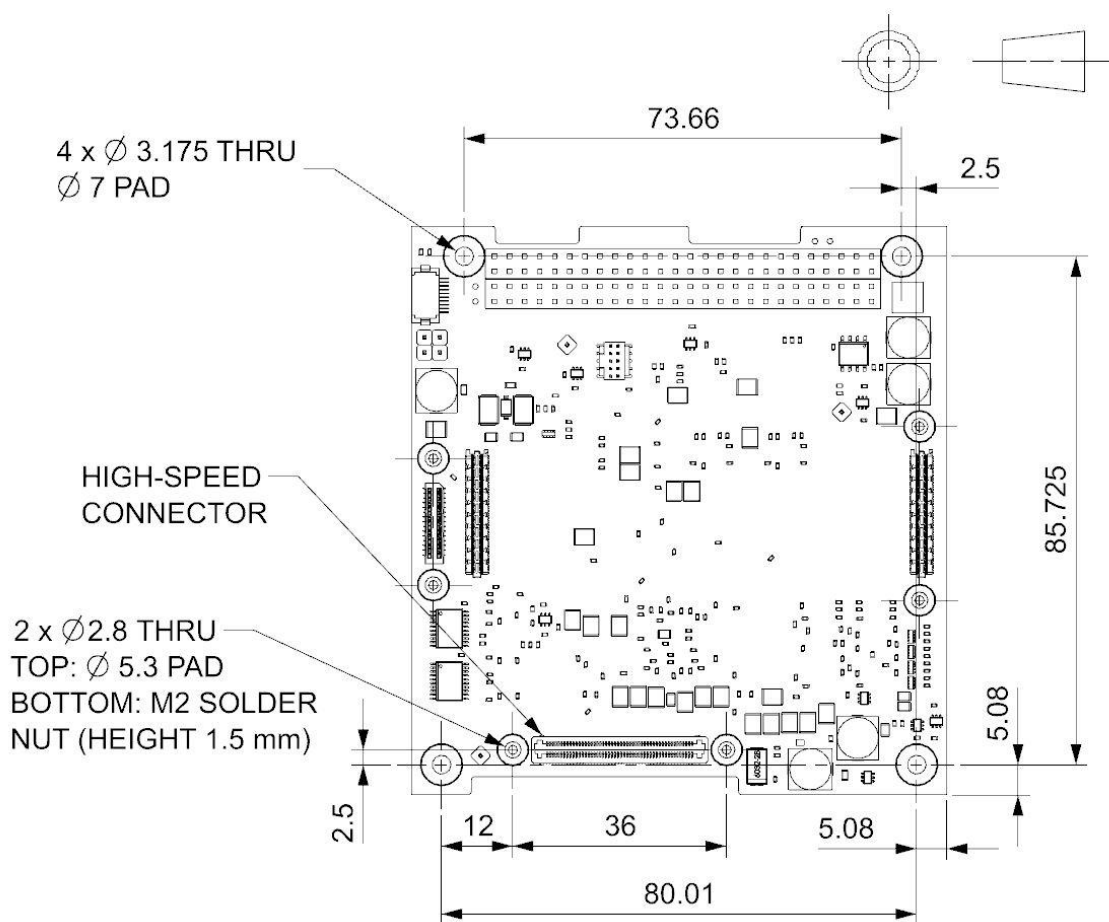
CE and High-Speed Connector Mounting Hole Details
